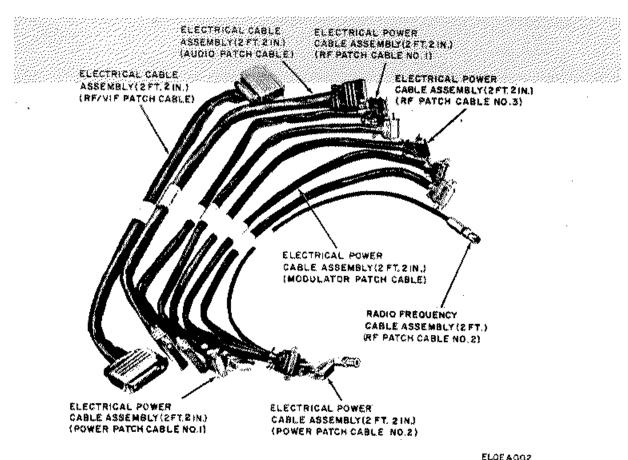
Cable Assembly Set, Electrical OA-2494/ARM-45.
